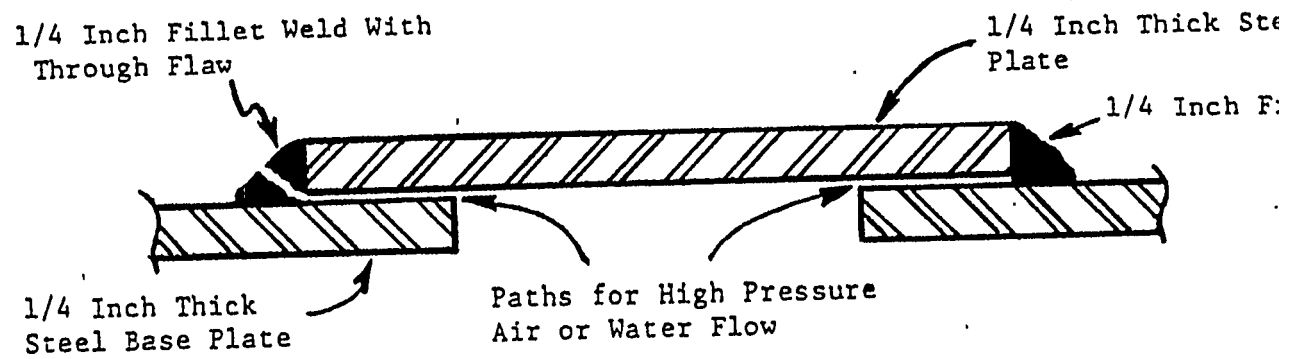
TYPICAL WELD SPECIMEN (CROSS-SECTIONAL VIEW)
